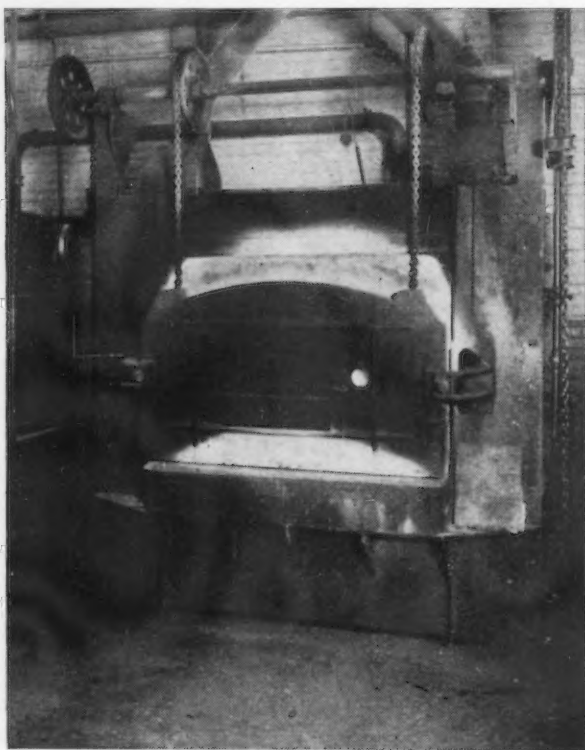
Oil-fired box-type furnace used for pack carburizing. Photo courtesy American Bosch Corp.
